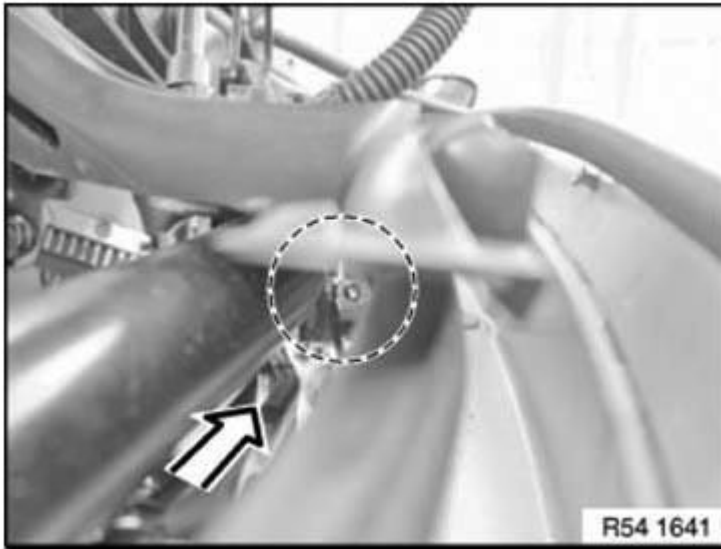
Installing Tip Of Special Tool Through Bore Hole
